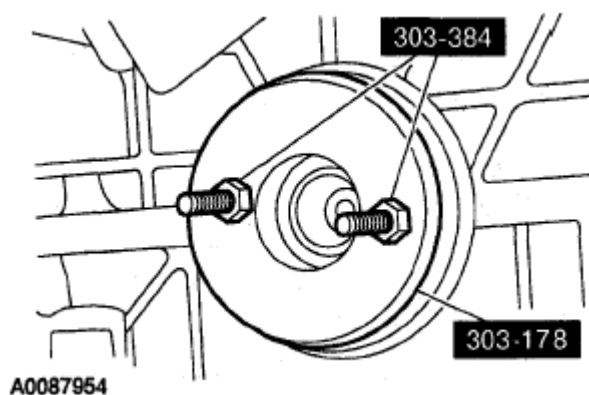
Using Special Tool To Install Crankshaft Rear Oil Seal
